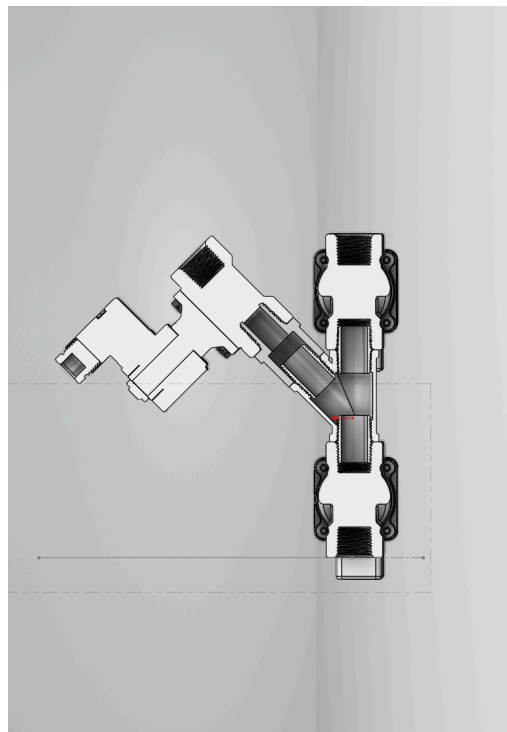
3 Ball Valve Measuring Chamber. Ball Valves are shown as closed and have solenoids attached.
